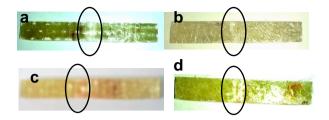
Photographic picture show the fracture surface in (a) X2, (b) X3, (c)X4, and (d)X5.
